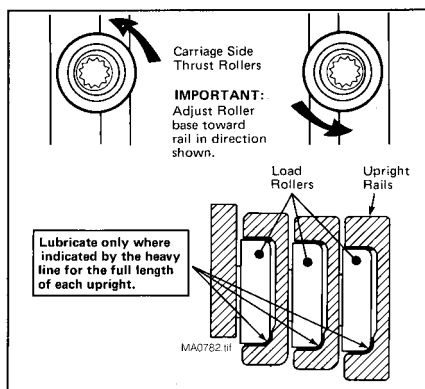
Rail Lubrication and Carriage Side Thrust Rollers.
